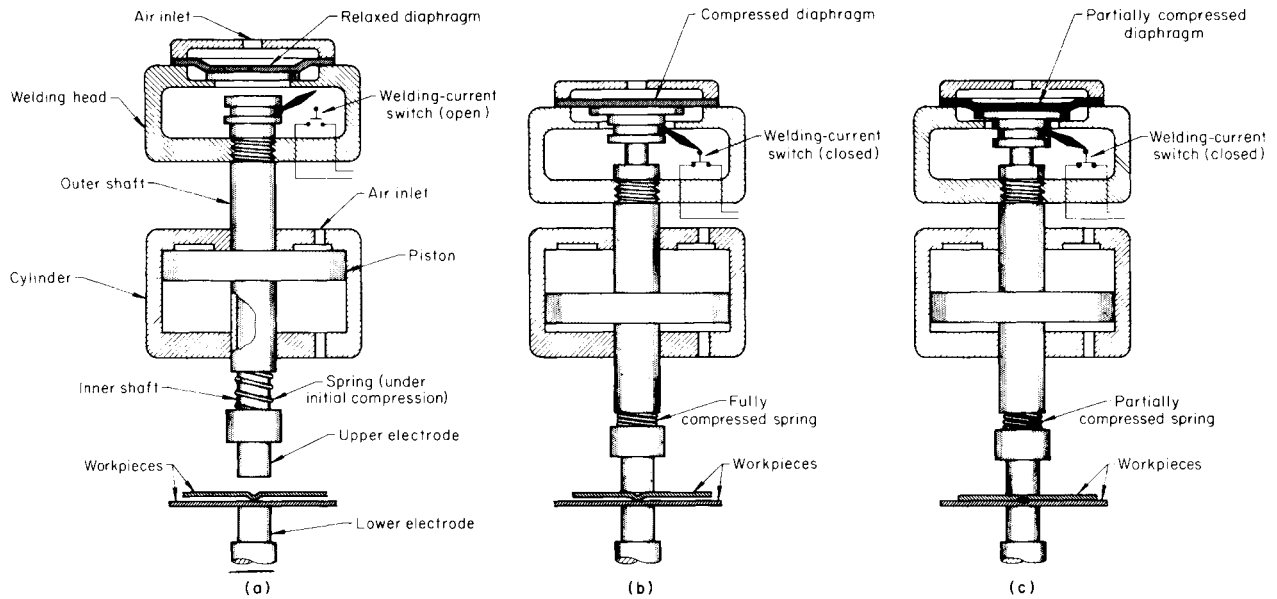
Typical fast followup (low-inertia) head for projection welding. (a) In open position. (b) In position for squeezing and heating the projection. (c) At instant of projection collapse and start of nugget formation
